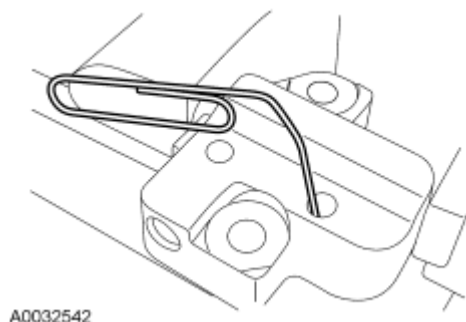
Installing Paper Clip Into Hole In Tensioner Housing To Hold Ratchet Assembly
